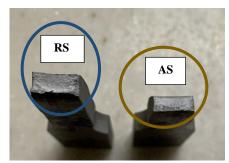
Fracture of A-SKEW tensile specimen at 1200 rpm
